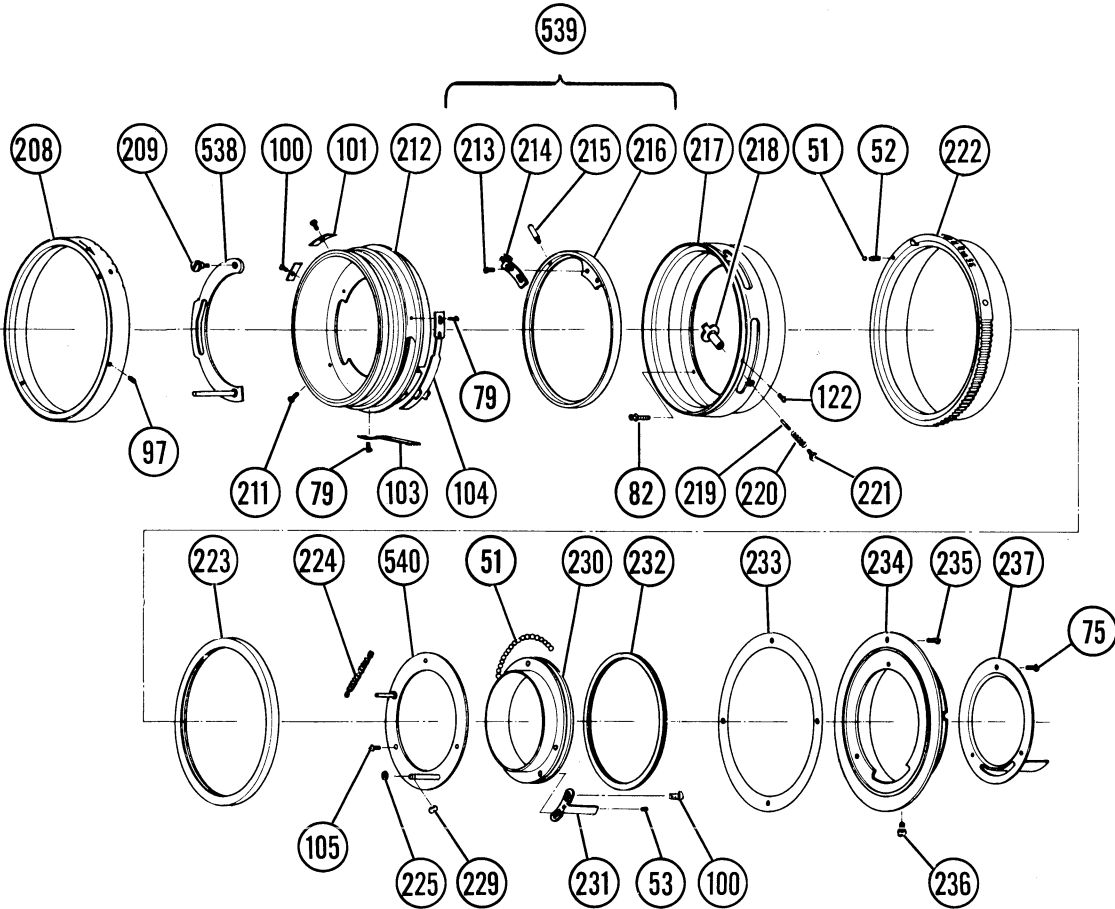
Mount Assembly, Konica (Ref. 551, Pg 58)
